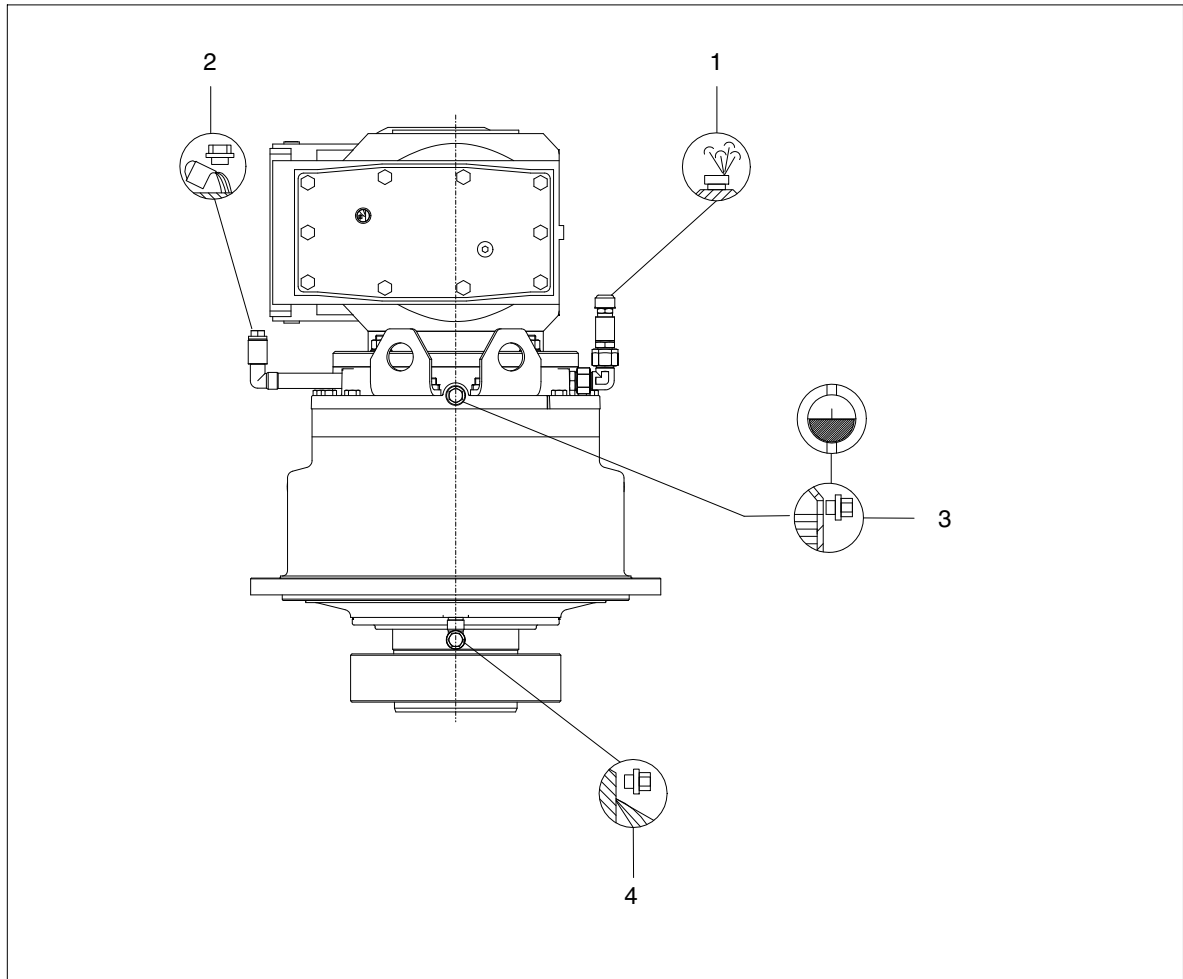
Gear-unit features on gear units of type O2C ("LSS" top) <sup>1)</sup>
